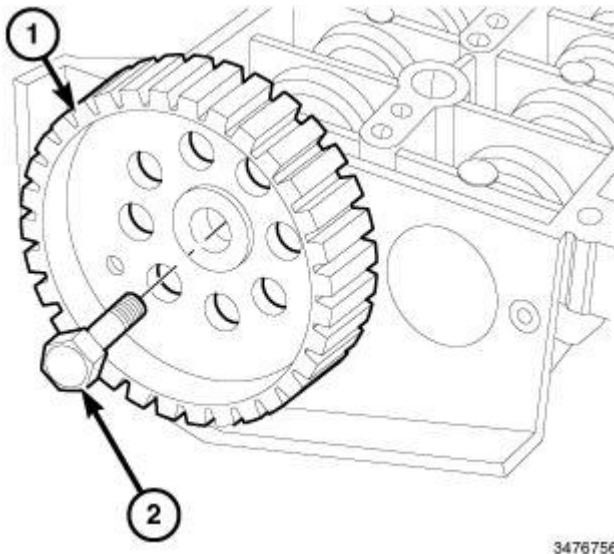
Camshaft Timing Belt Sprocket & Bolt
